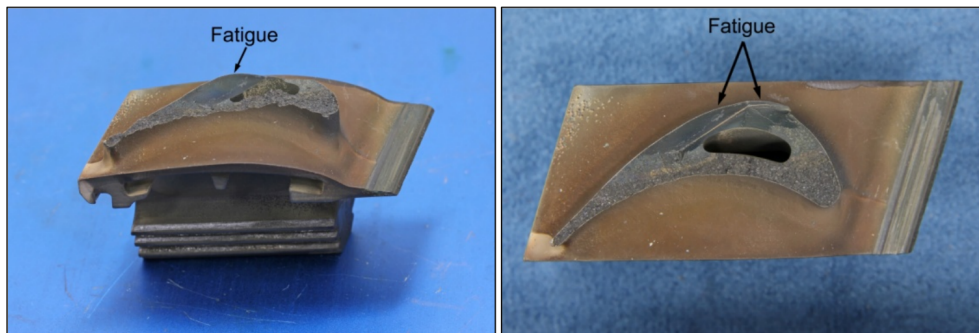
Fatigue failure of a turbine blade
